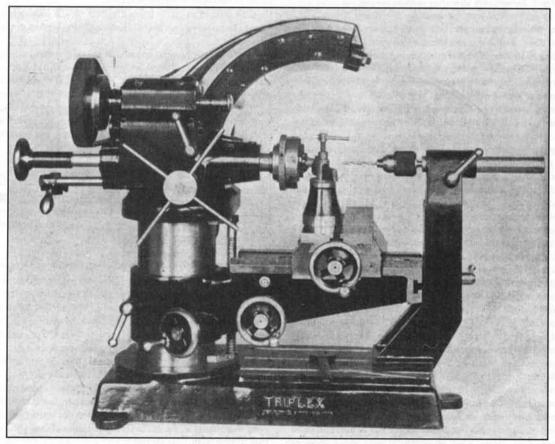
The "Triplex" Tool Arranged as a Traversing Mandrel Lathe.
